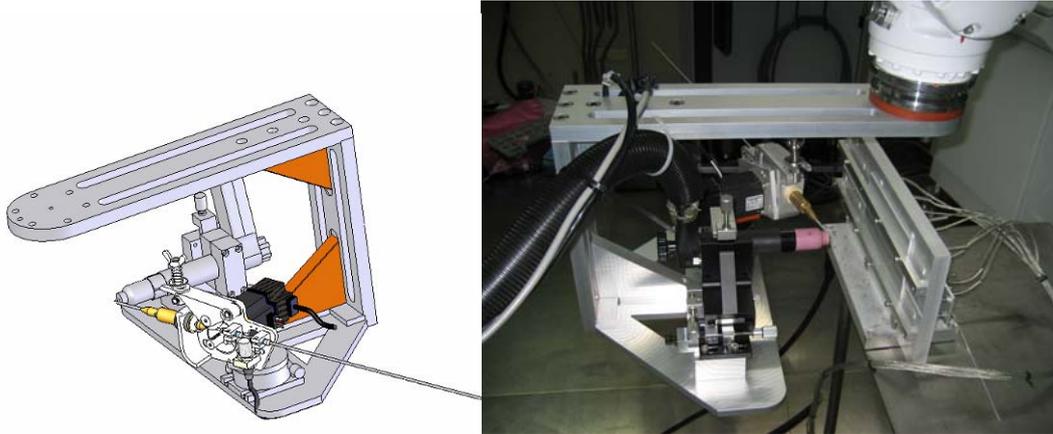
Arc welding configuration which is mounted to robot arm
